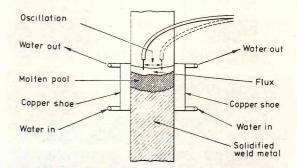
Principle of operation of the slectro-slag welding process
